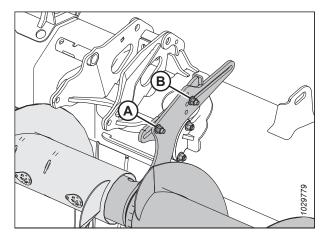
Initial Position of Adjustable Mounts – Three-Piece Auger
